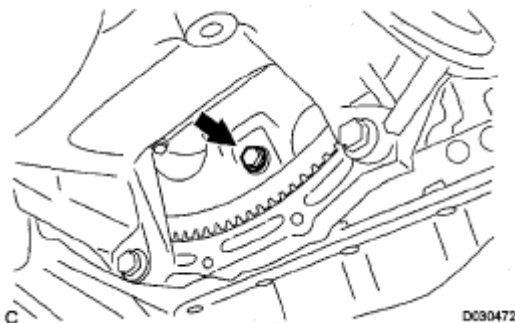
Locating Torque Converter Clutch Mounting Bolts
